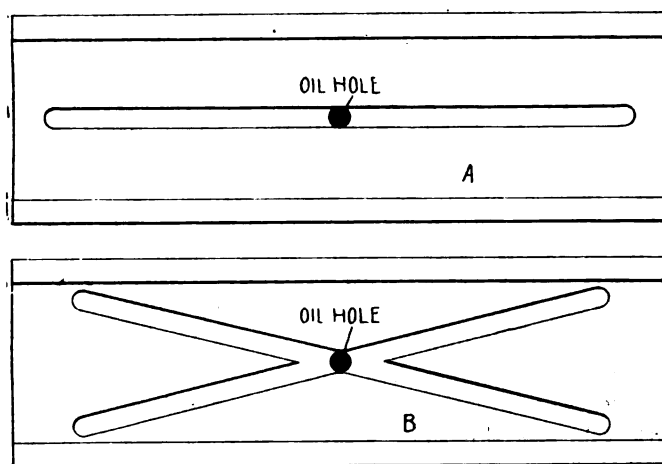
Showing Two Methods of Cutting an Oil Distributing Groove in Connecting Rod and Main Bearings
